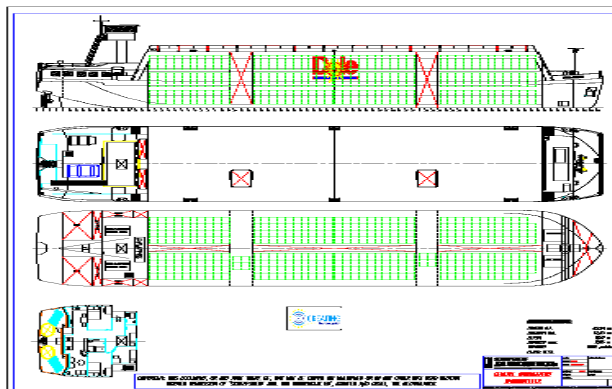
General arrangement plan and side elevation of the modified small inland banana carrier
